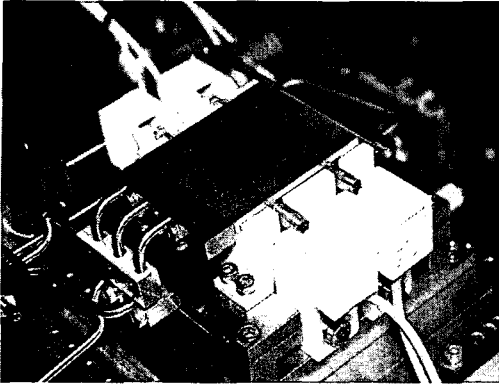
The final version of heating tool consisting of two bodies which is equipped in the flip-chip bonder
